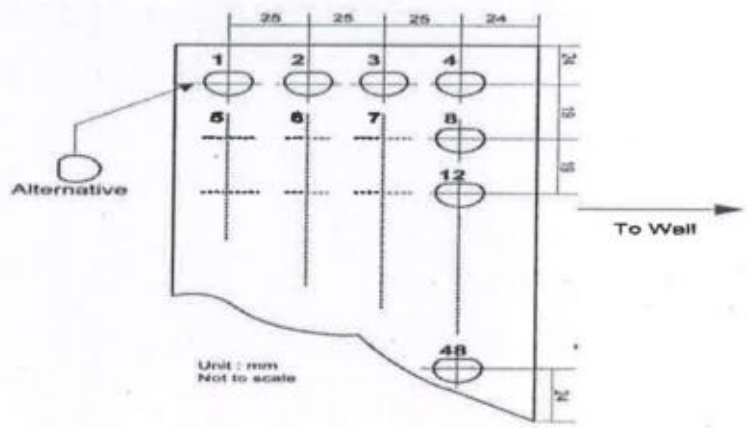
Typical FC patch panel of wall mounted FDF 48F (12 rows x 4 columns)
